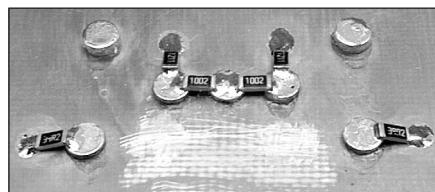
D — SMT resistors soldered to base board of the Audio Amp in the beginning stages of assembly.
